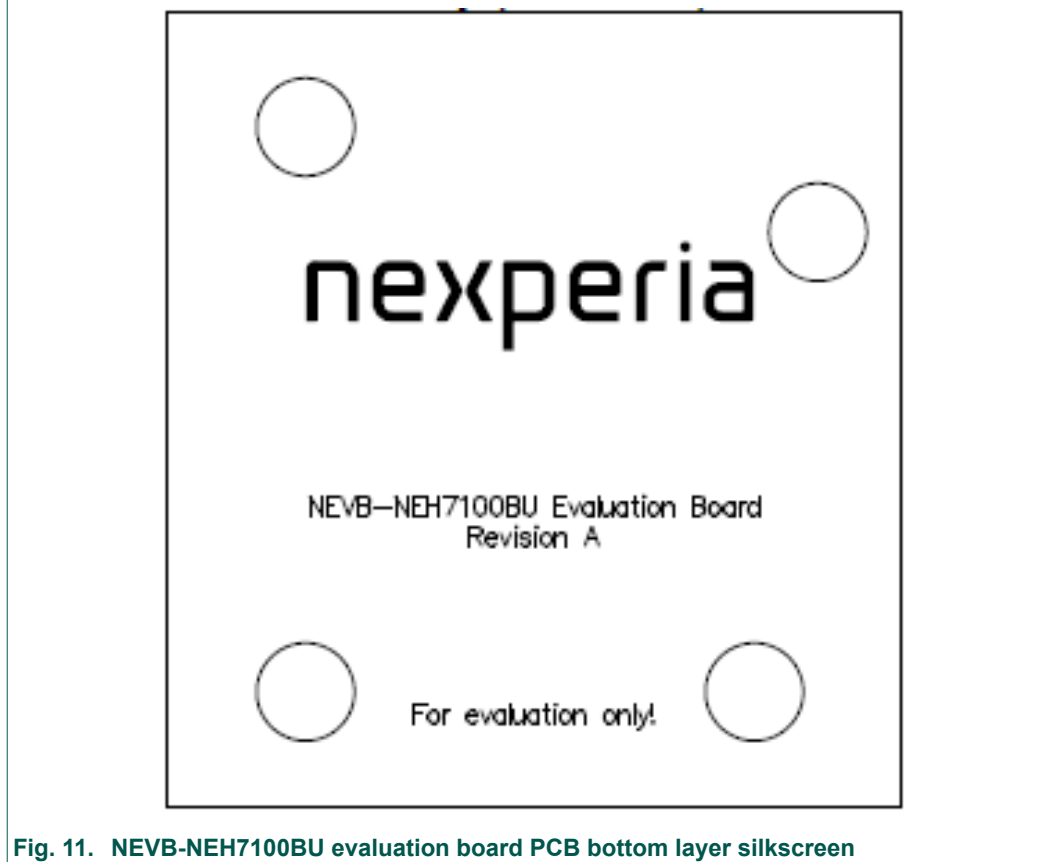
NEVB-NEH7100BU evaluation board PCB bottom layer silkscreen
